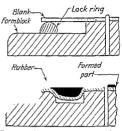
Shearing (trimming) a rubberformed part.:
